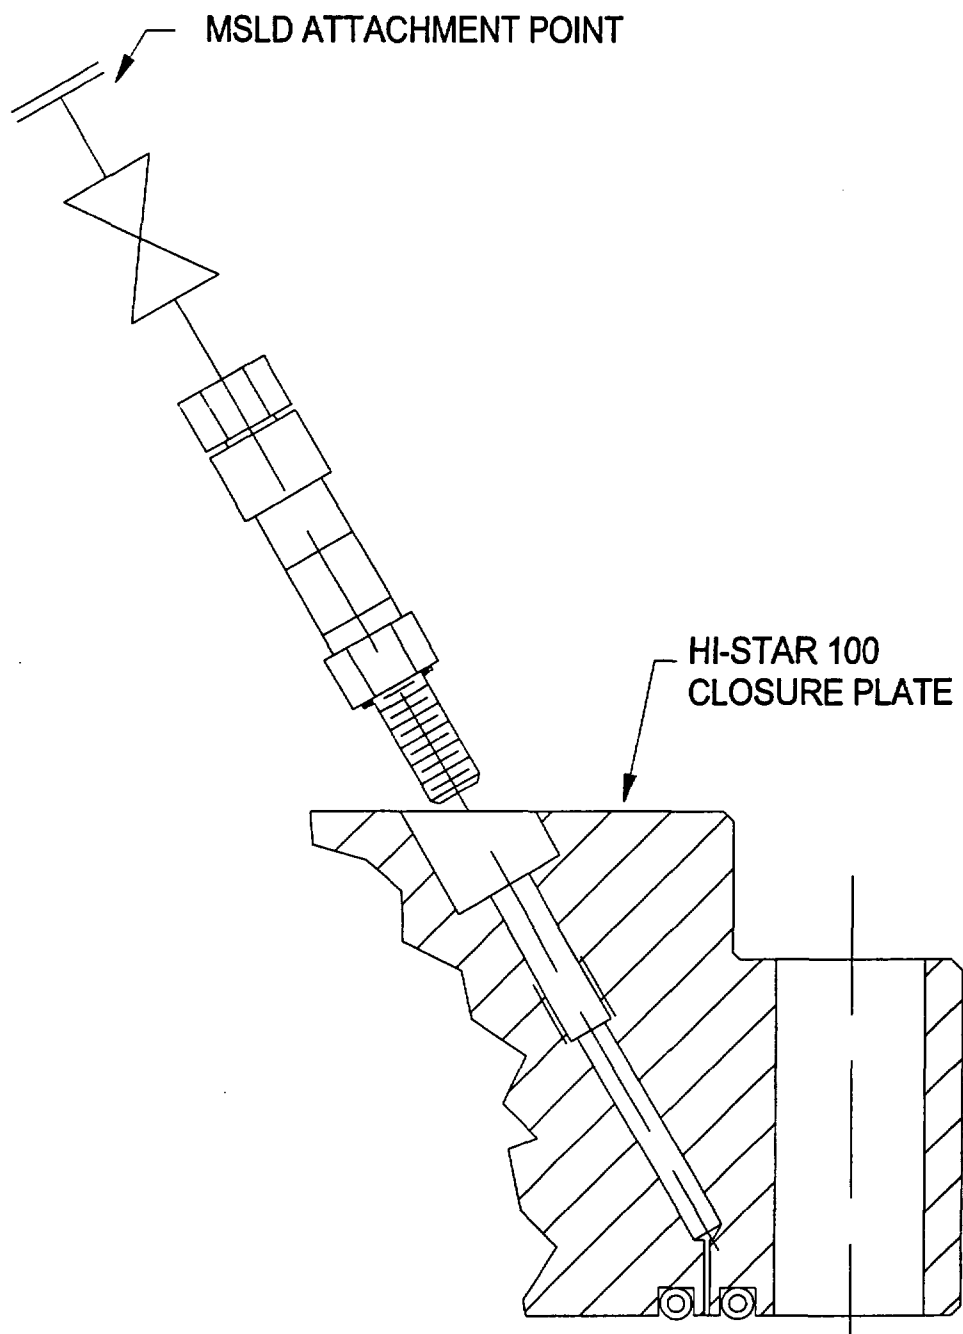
; HI-STAR 100 Closure Plate Test Tool
